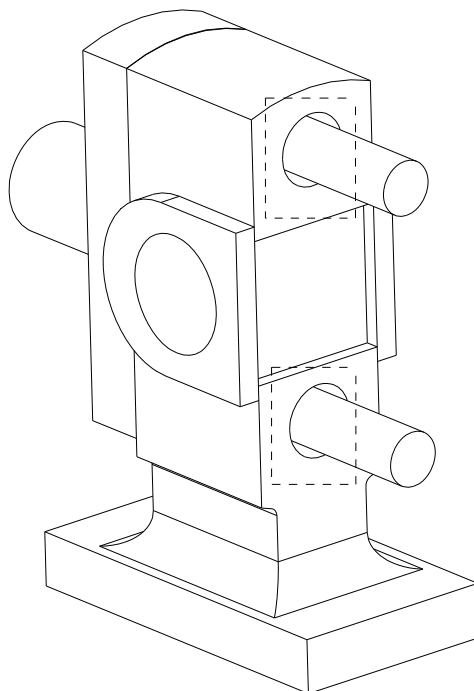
Diameter of the hole and the bolt in the Crosshead assembly
